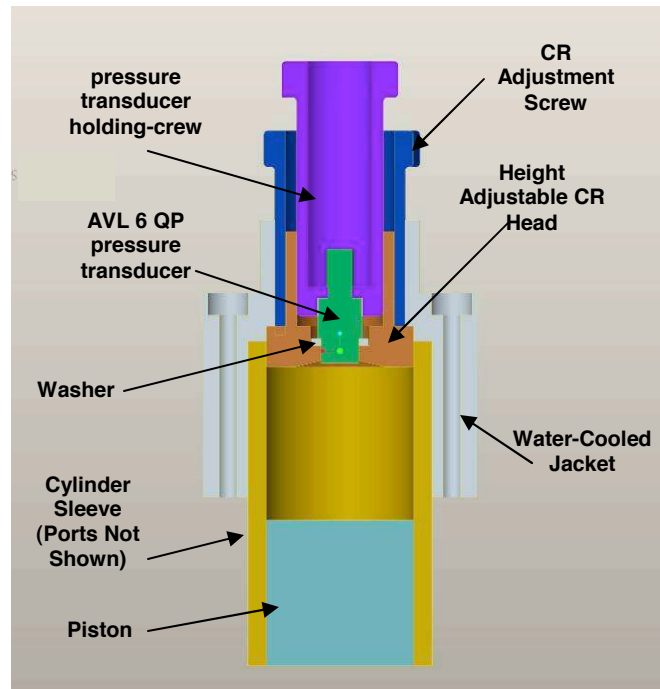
Engine Head and Cylinder Cross Section for use with AVL 6QP pressure transducer.
